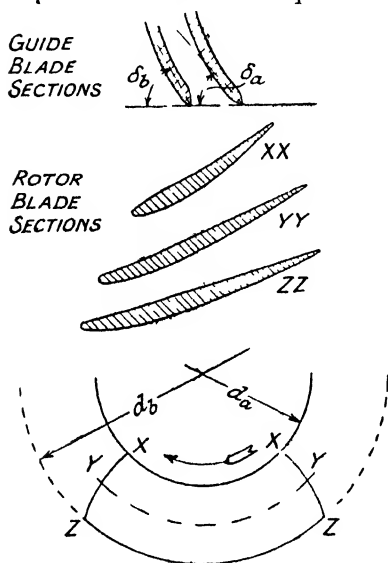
Blade cross sections for rotor and recuperator of axial flow pump
